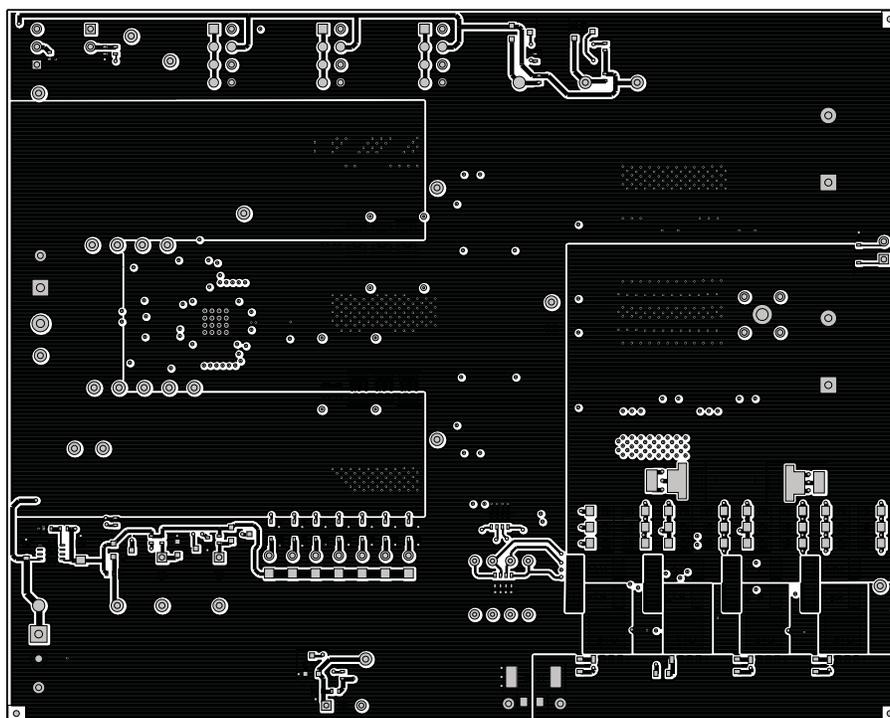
TPS51621EVM-602 Bottom Layer, Top View
